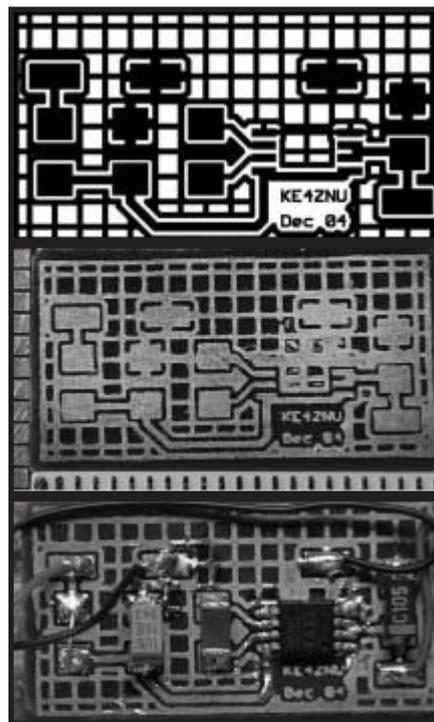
The top image is the top copper layer from an EAGLE board design. The bare board shows several flaws, but the one on the bottom came out fine. The ruler scales are 0.050" vertically and 1 mm horizontally. The board has extremely small features!
